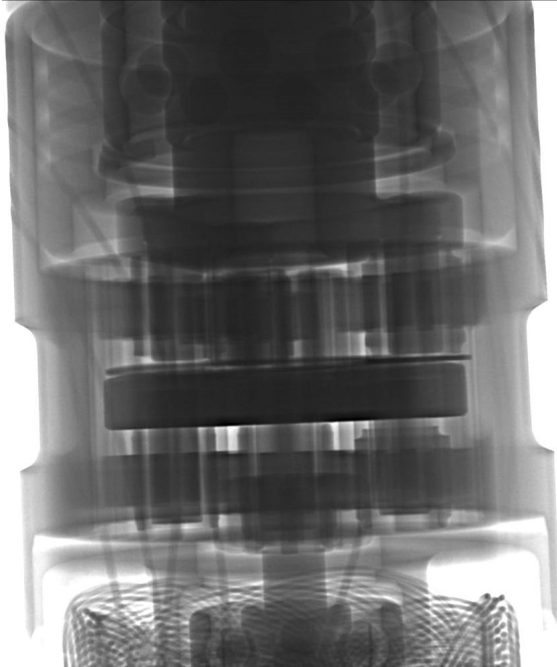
X-Ray Image Showing the Gearbox Section of the Actuator. Output Ball Bearings are at the Top of the Image and the Front Motor Bearing is at the Bottom
